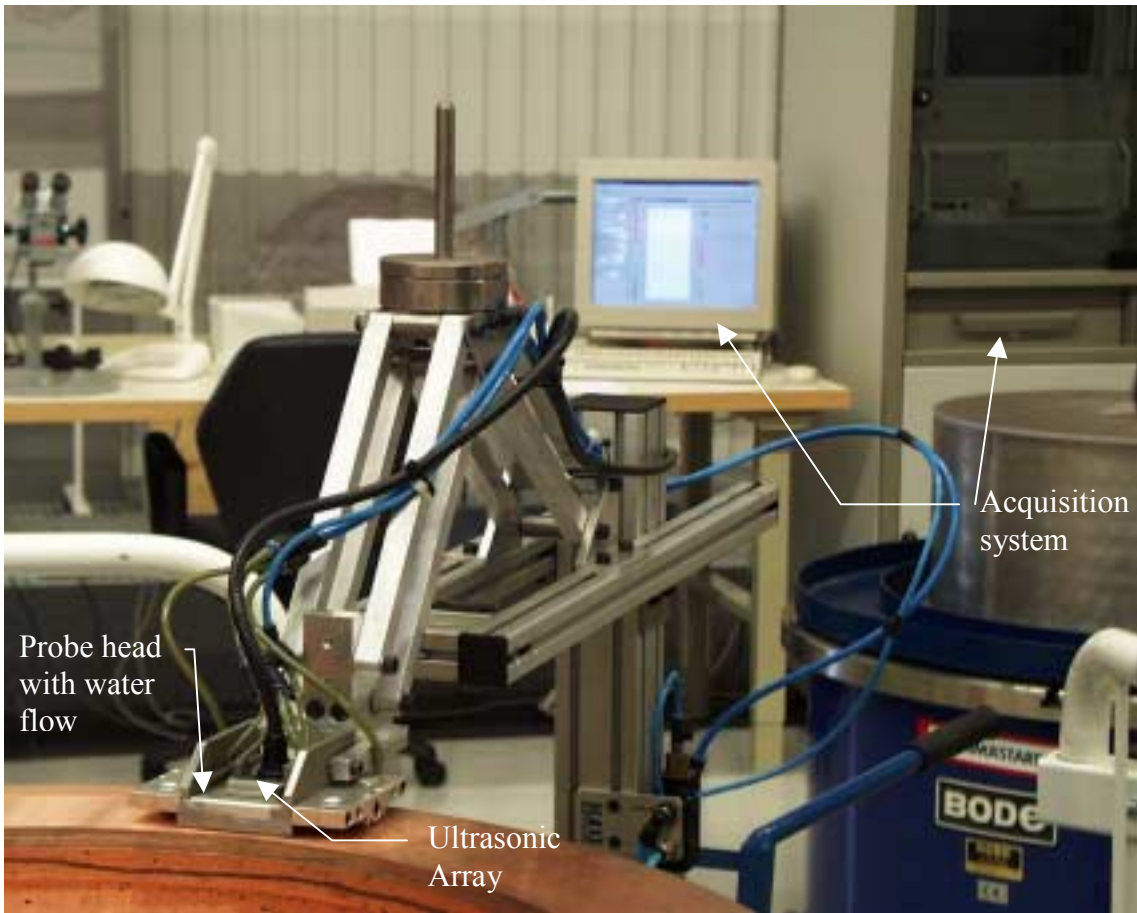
Ultrasonic equipment for inspection of the electron beam welded lid.
